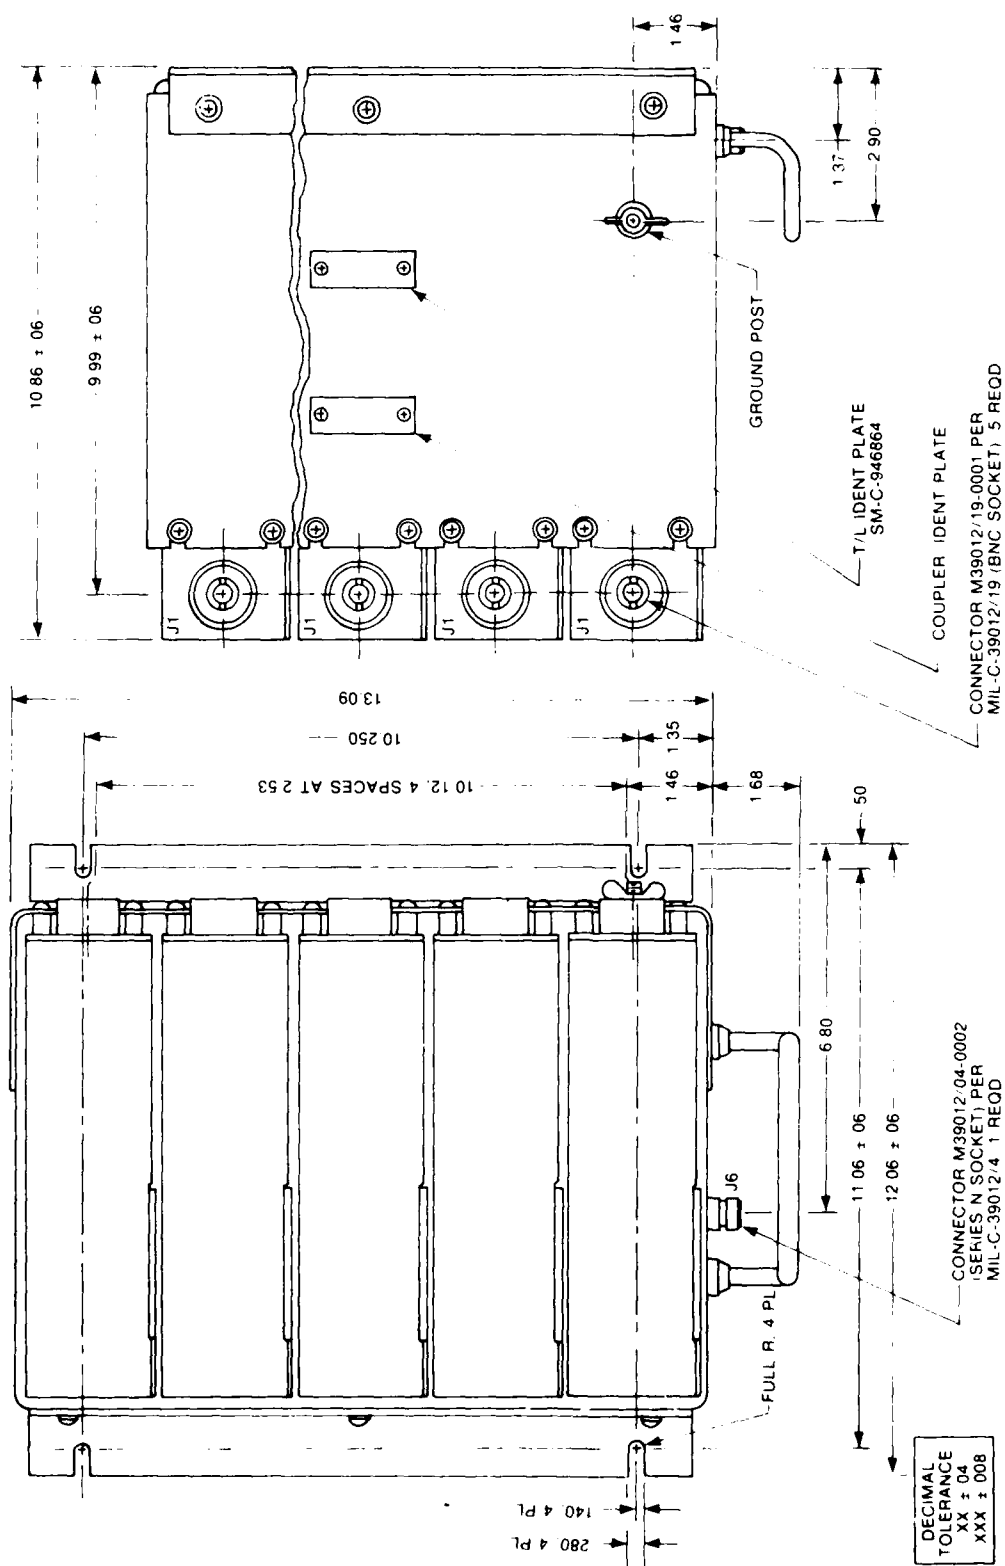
Outline Drawing, 5-Channel Multiplexer (TD-1289) (V1 GRC).
